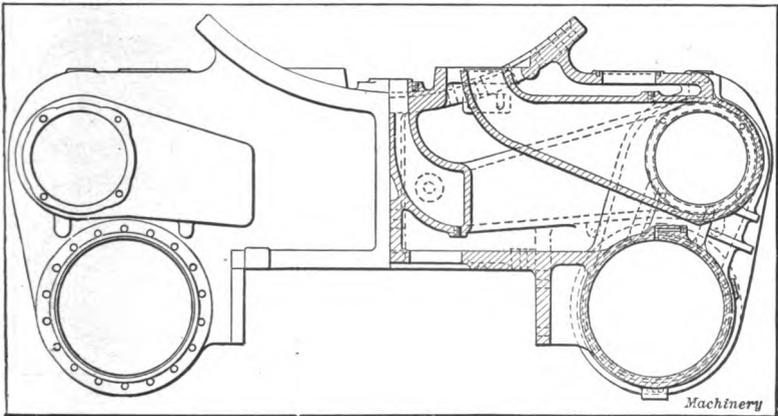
Front View of Locomotive Cylinders of the Single-expansion Piston Valve Type
